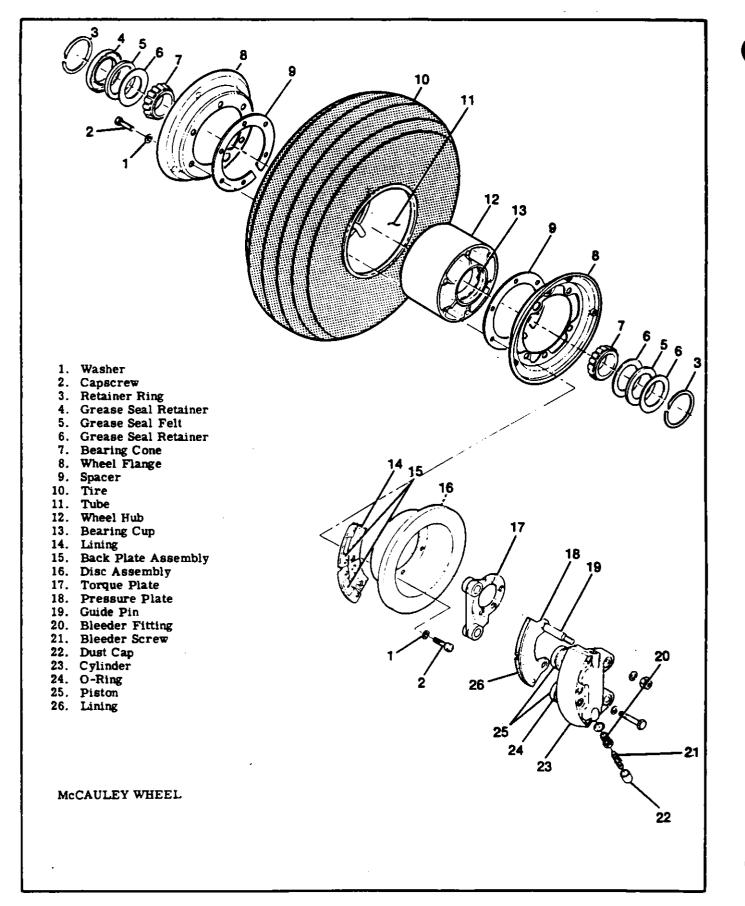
Main Wheel and Tire Assembly (Sheet 2 of 3)
